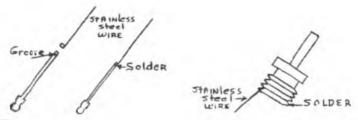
Soldering of Stainless Steel Wire to Phono Jack
